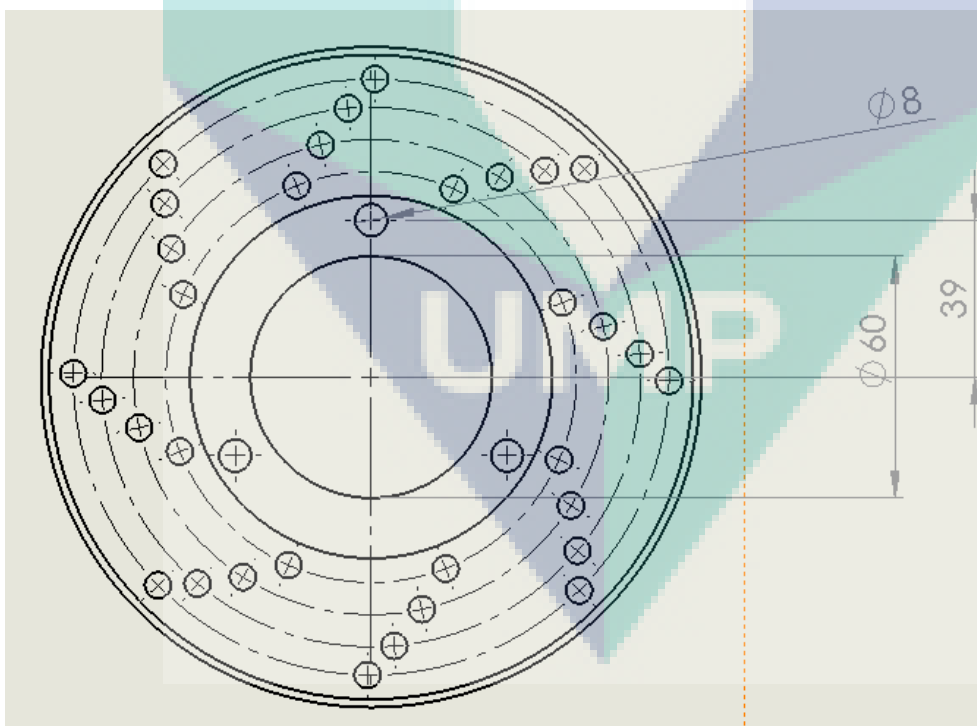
13 Drawing specifications for the custom-drilled disc brake.
